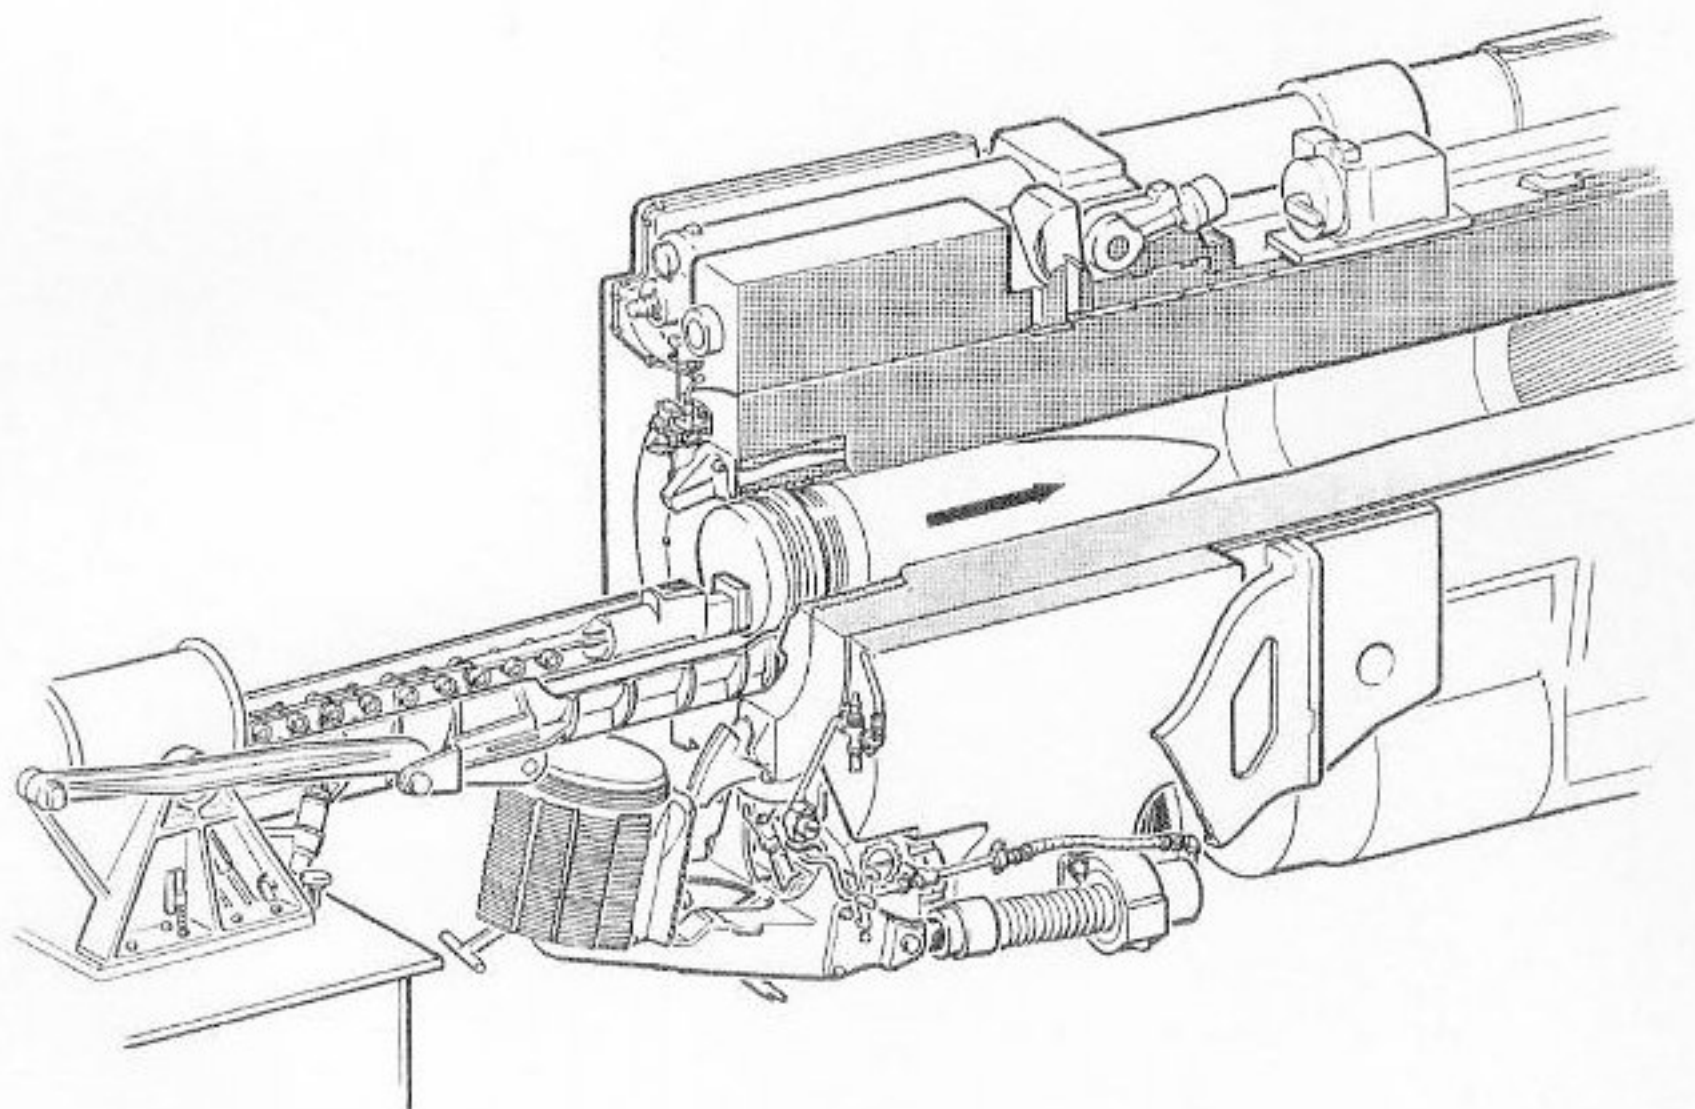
M. 16-inch Gun Assemblies. Projectile Ramming Action.
